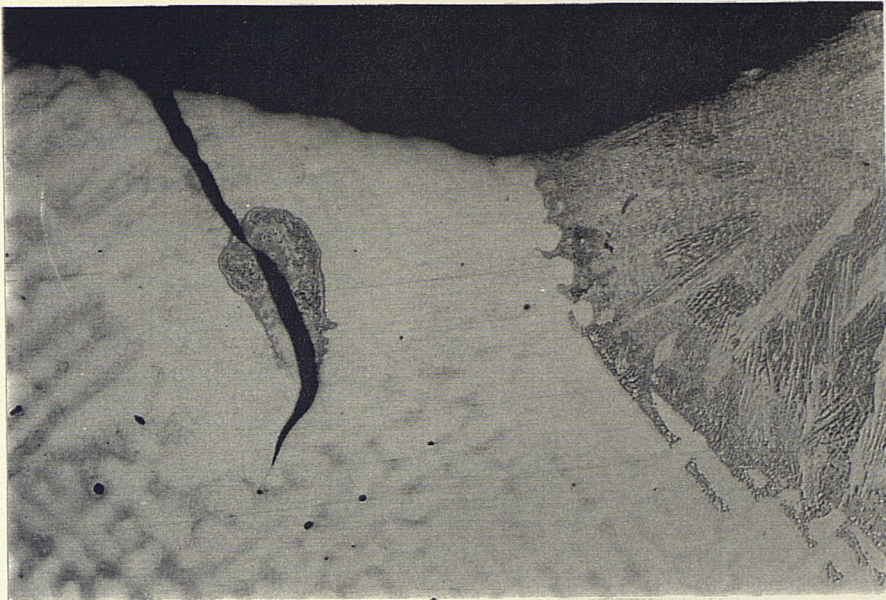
Surface-breaking weld induced crack in WBL-3794. The grain boundary crack path and crack position approximately 1.5mm from the fusion zone are illustrated. x50.
